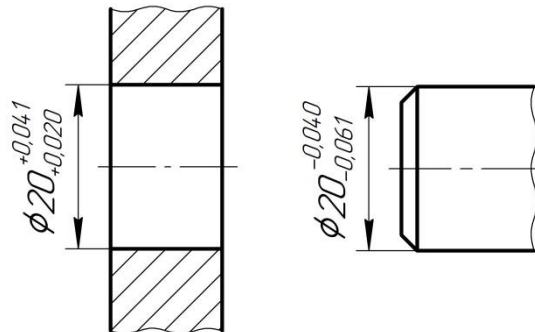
Is a conventional sign of nominal hole and shaft dimensions
